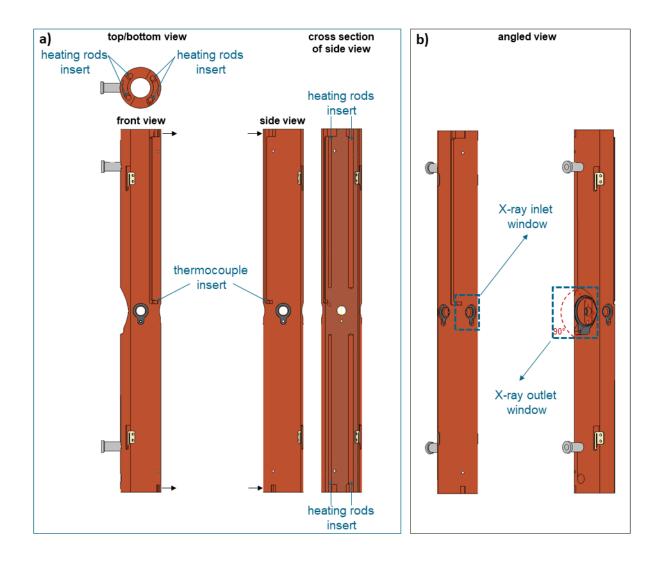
Technical drawing of the oven. (a) Top/bottom, front and side views with thermal insert. Crosssection and top/bottom view show the heating inserts. (b) Angled view of the inlet and outlet windows for the X-rays.
